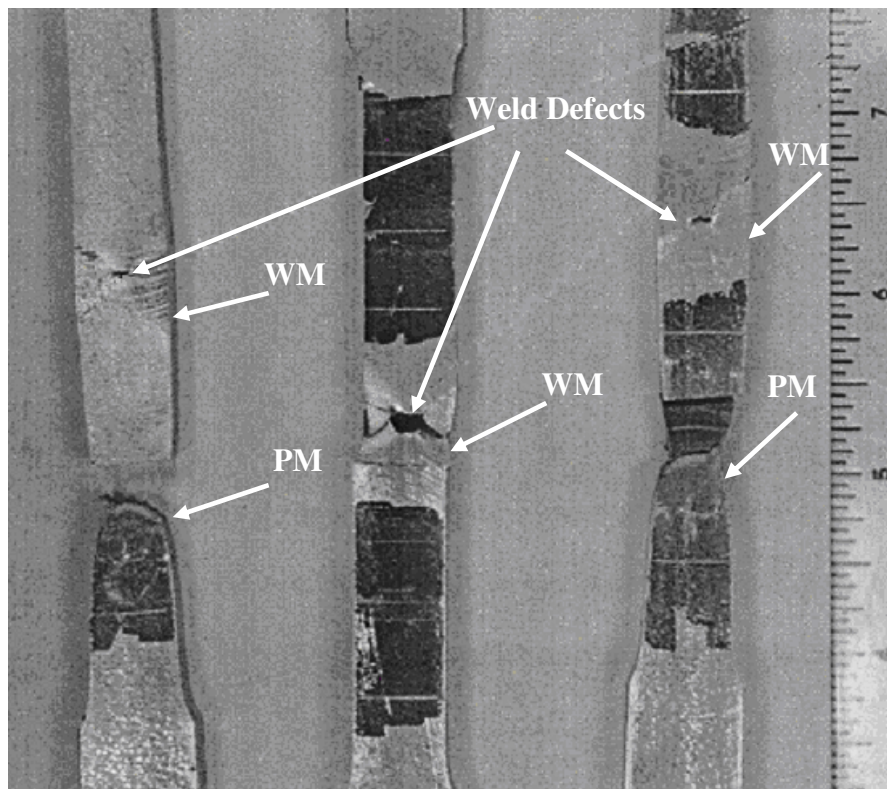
Examples of broken tensile specimens showing weld defects.
